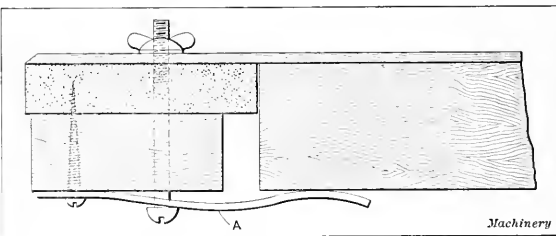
T-square held by Pressure of Clamp Spring on Under Side of Drawing Board
